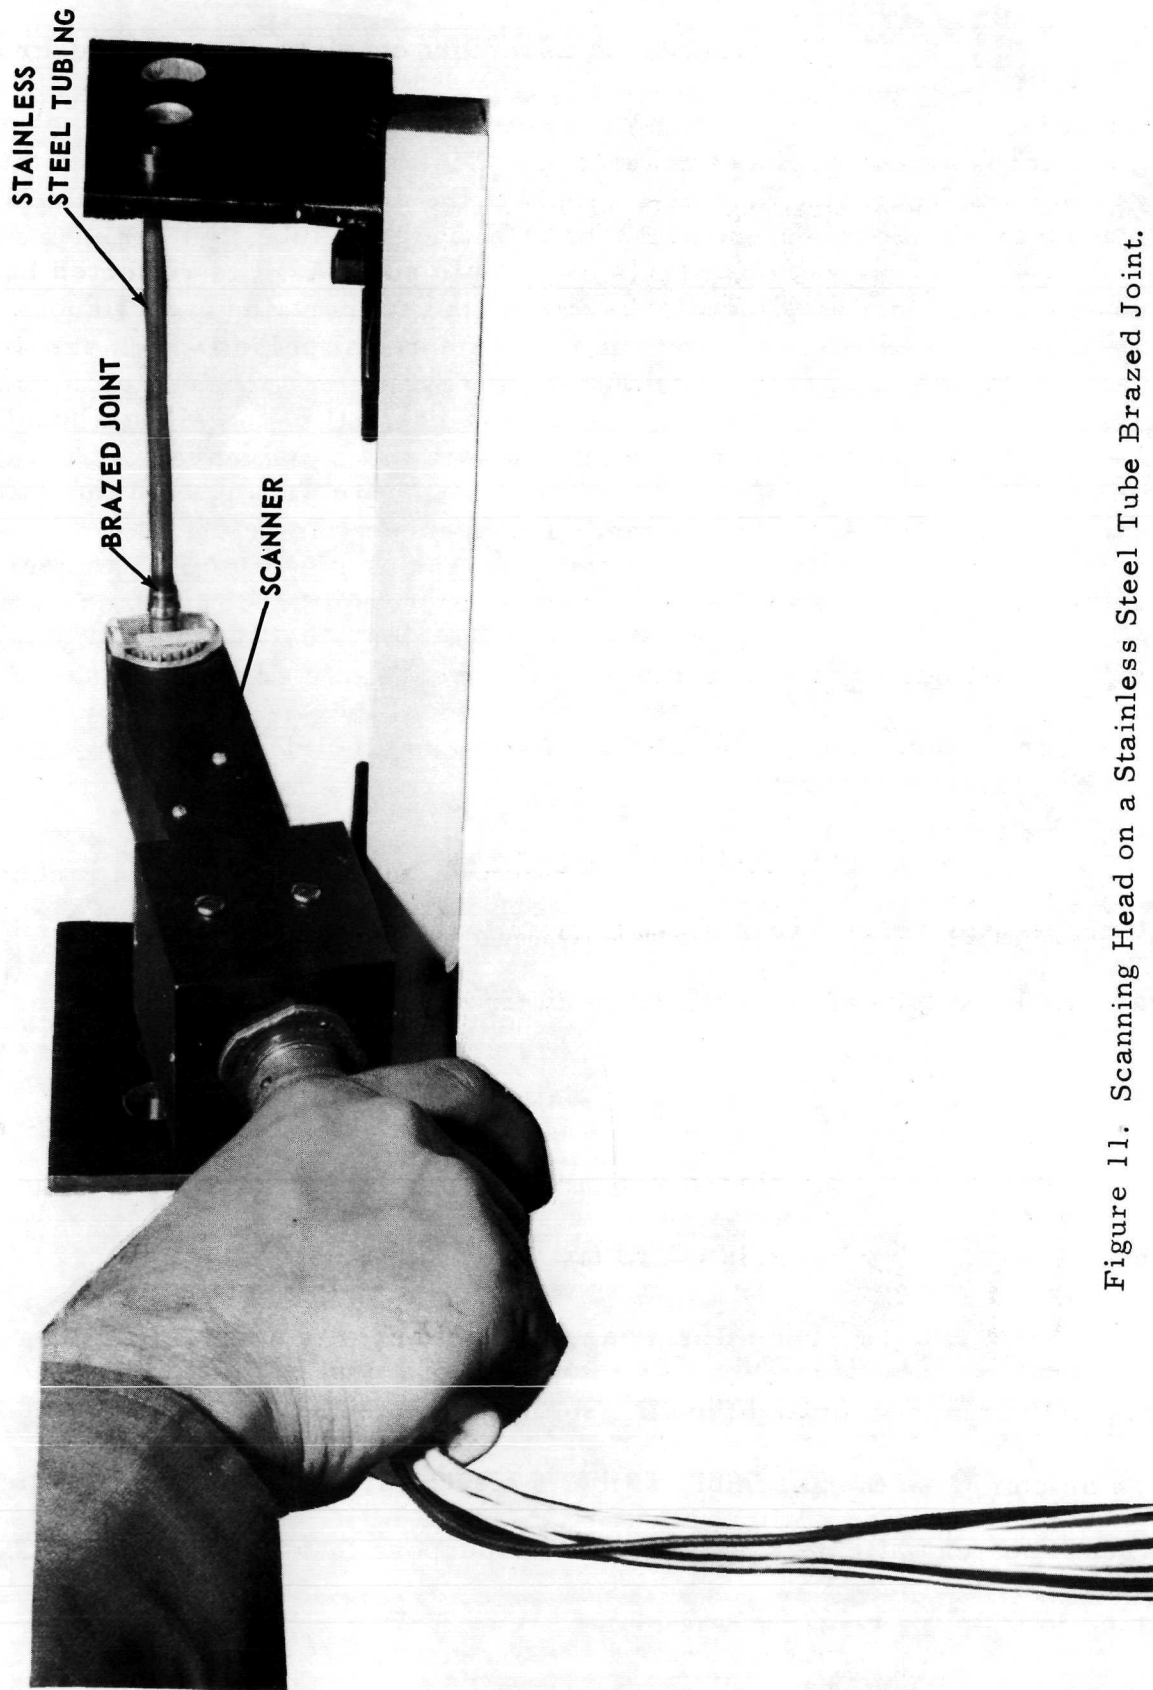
Scanning Head on a Stainless Steel Tube Brazed Joint.
